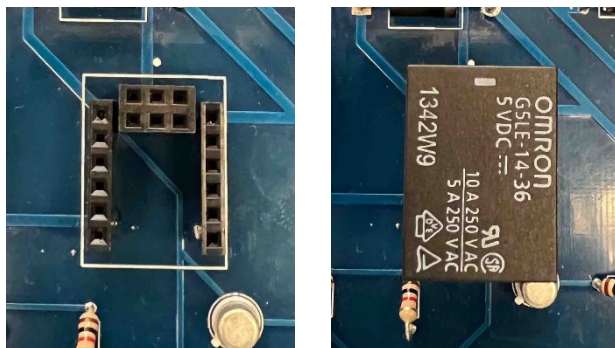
Custom Socket (On Left), Relay Placed into Socket (On Right)
